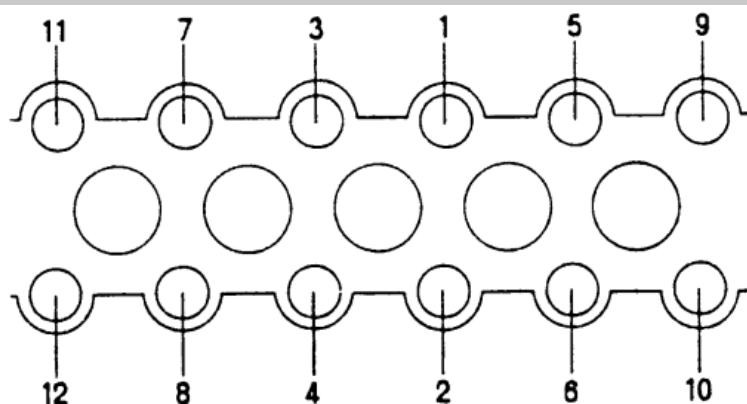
2.3L and 2.4L 5-cylinder engine head bolt tightening sequence
